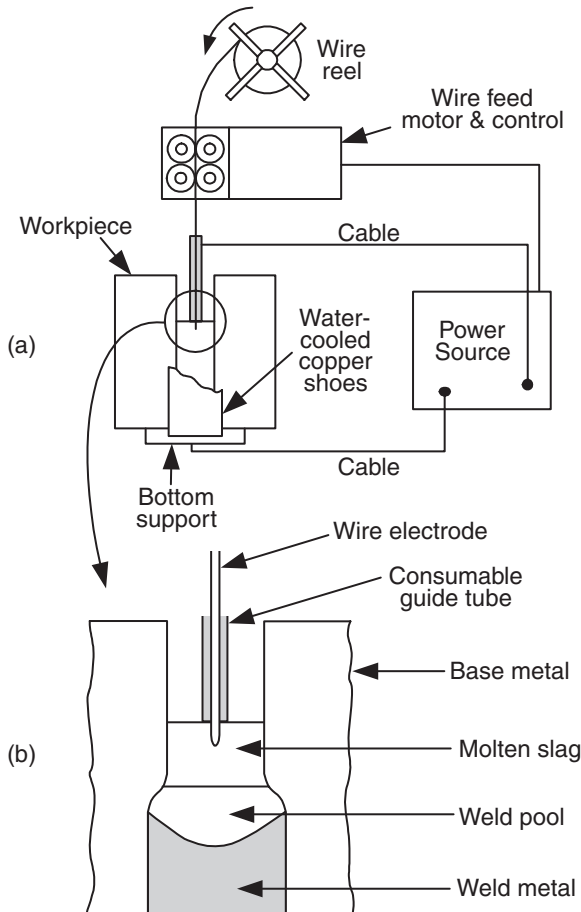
Electroslag welding: (a) overall process; (b) welding area enlarged.
